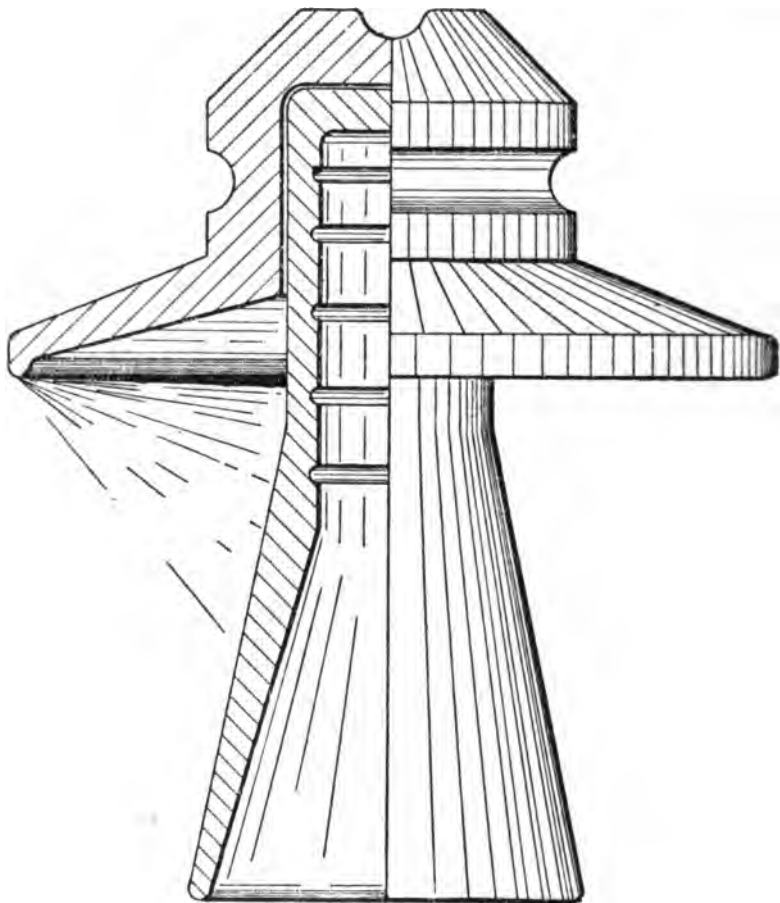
Special Form of High Tension Insulator made by Messrs. Buller.
